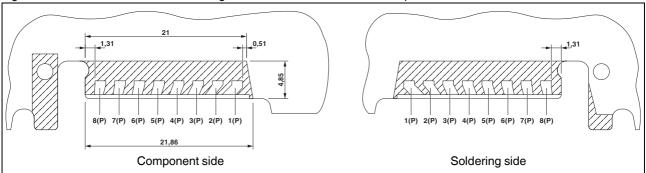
Detailed dimensional drawing of TBUS8-...-PPPPPPS contact pads
